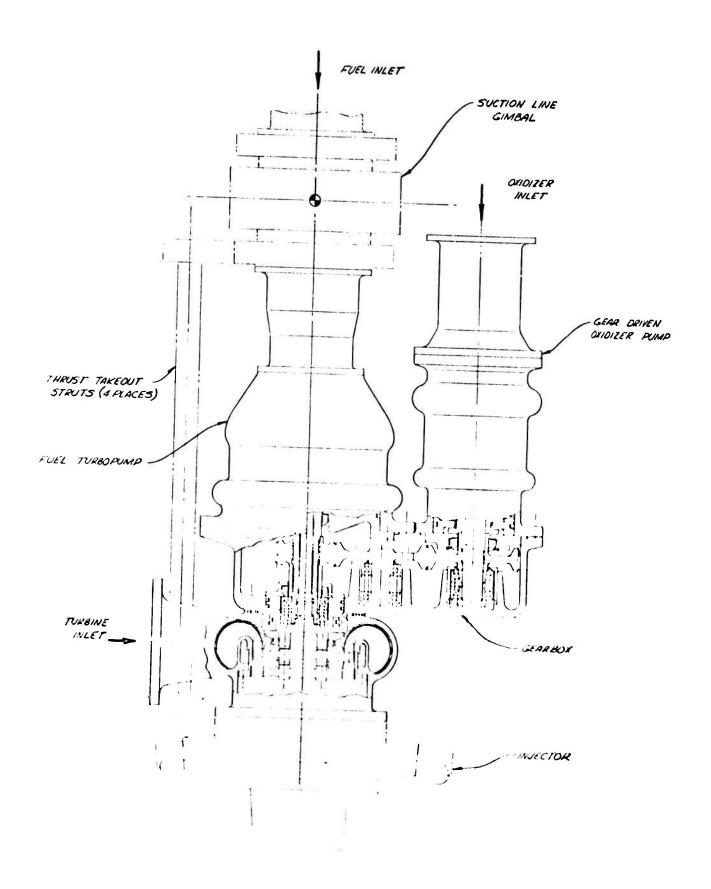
10K Engine In-Line Fuel Pump (Sheet 3 of 4)
